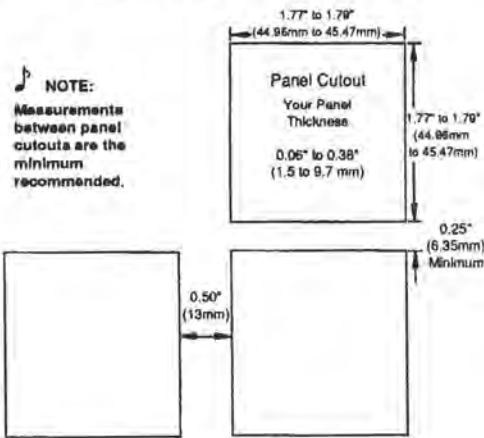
Series 965 Multiple Panel Cutout Dimensions
